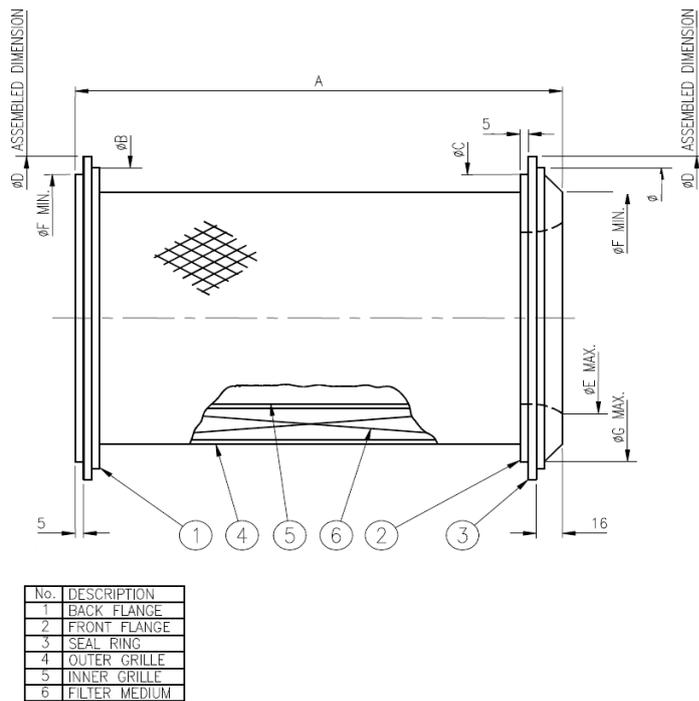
35, 75 and 160l/sec Push Through Filter Dimensional Details
